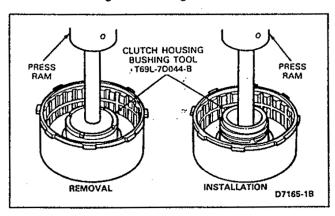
Replacing Reverse-High Clutch Rear Bushing
